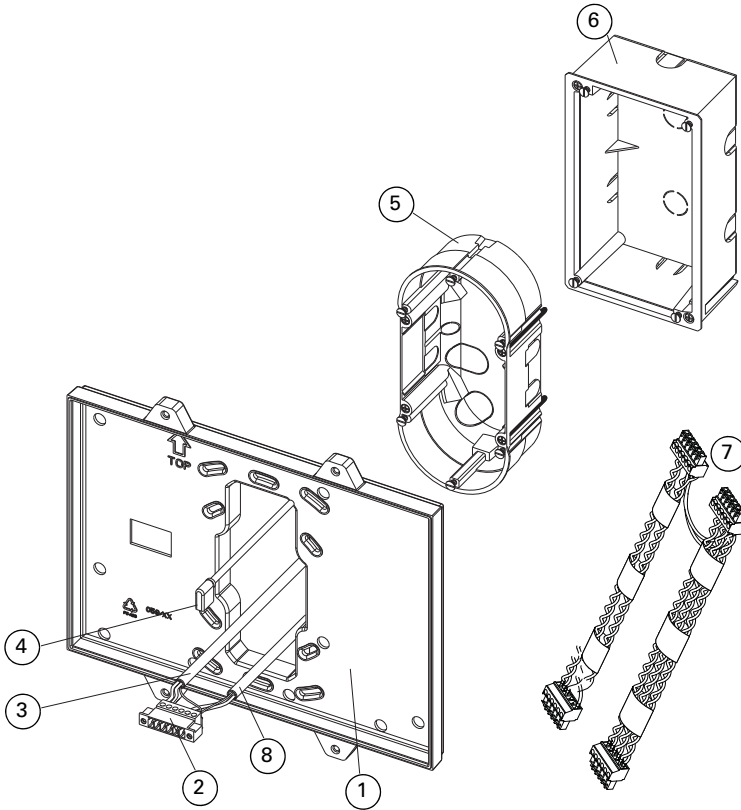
Installation Overview of P-WSH- To be mounted with FC1D2
